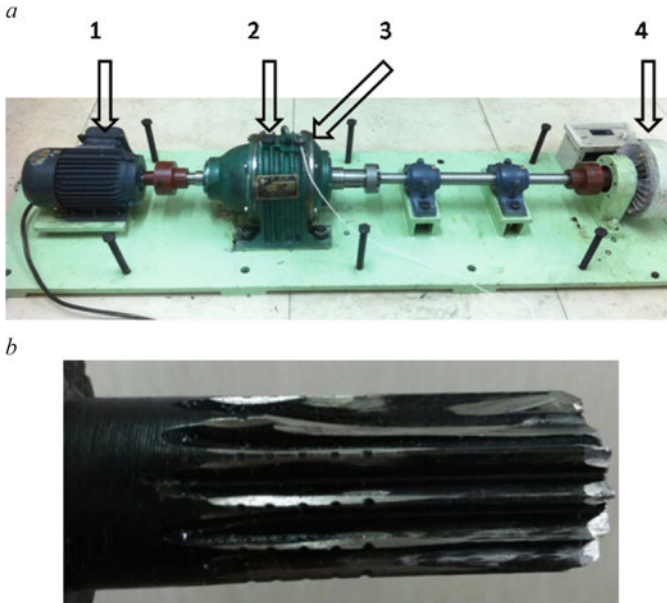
Planetary gearbox test rig. (a) Planetary gearbox test rig. (b) Tooth broken sun gear
